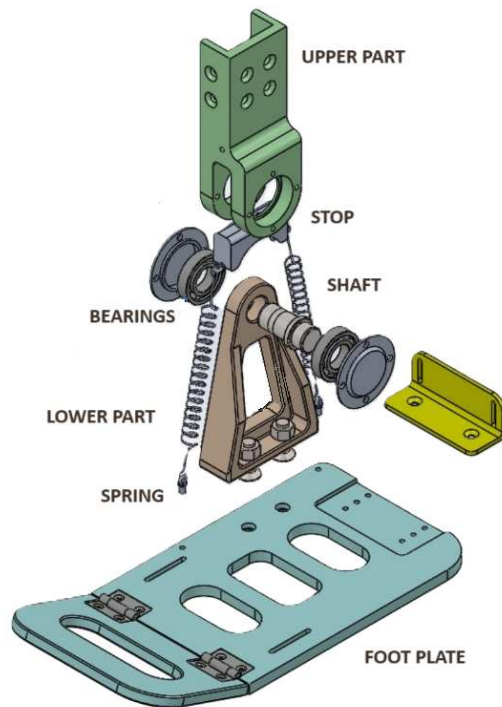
Ankle joint on exploded view on 3D CAD software.
